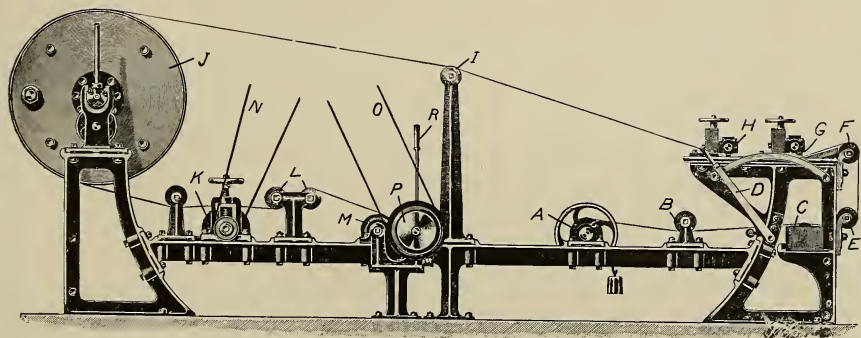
THE BRIDGE COLD CURE MACHINE.
